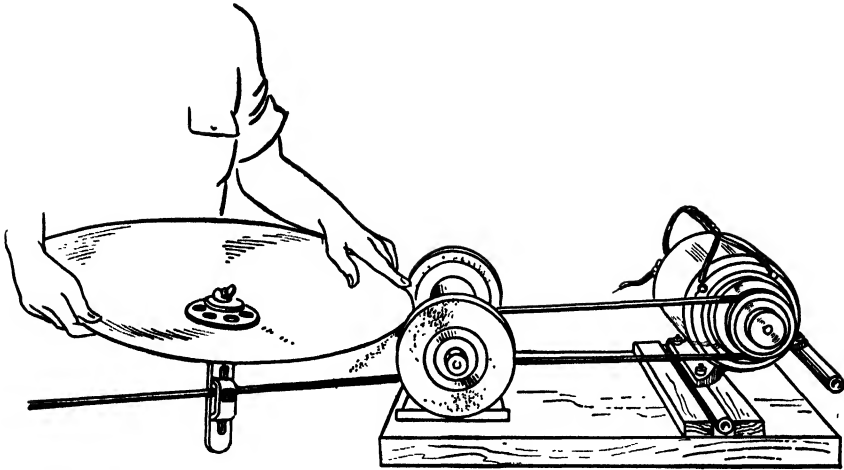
Sharpening a disk with a portable electric motor. Note the cleats on the grinder baseboard which hold the motor in place. Part of the weight of the motor helps keep the belt tight.
